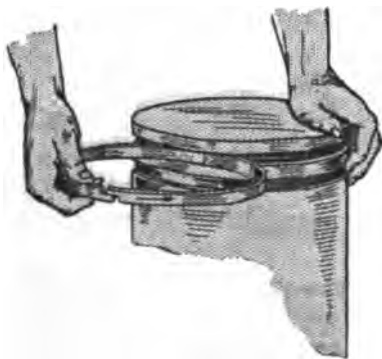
Giving a piston ring its initial fitting. The ring is turned in the direction of the arrow.
